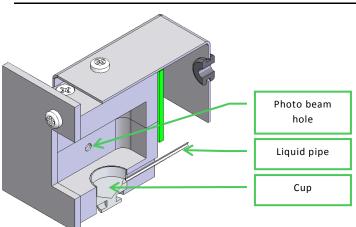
ENV-303LPHD cut-away view of photo sensors holes
